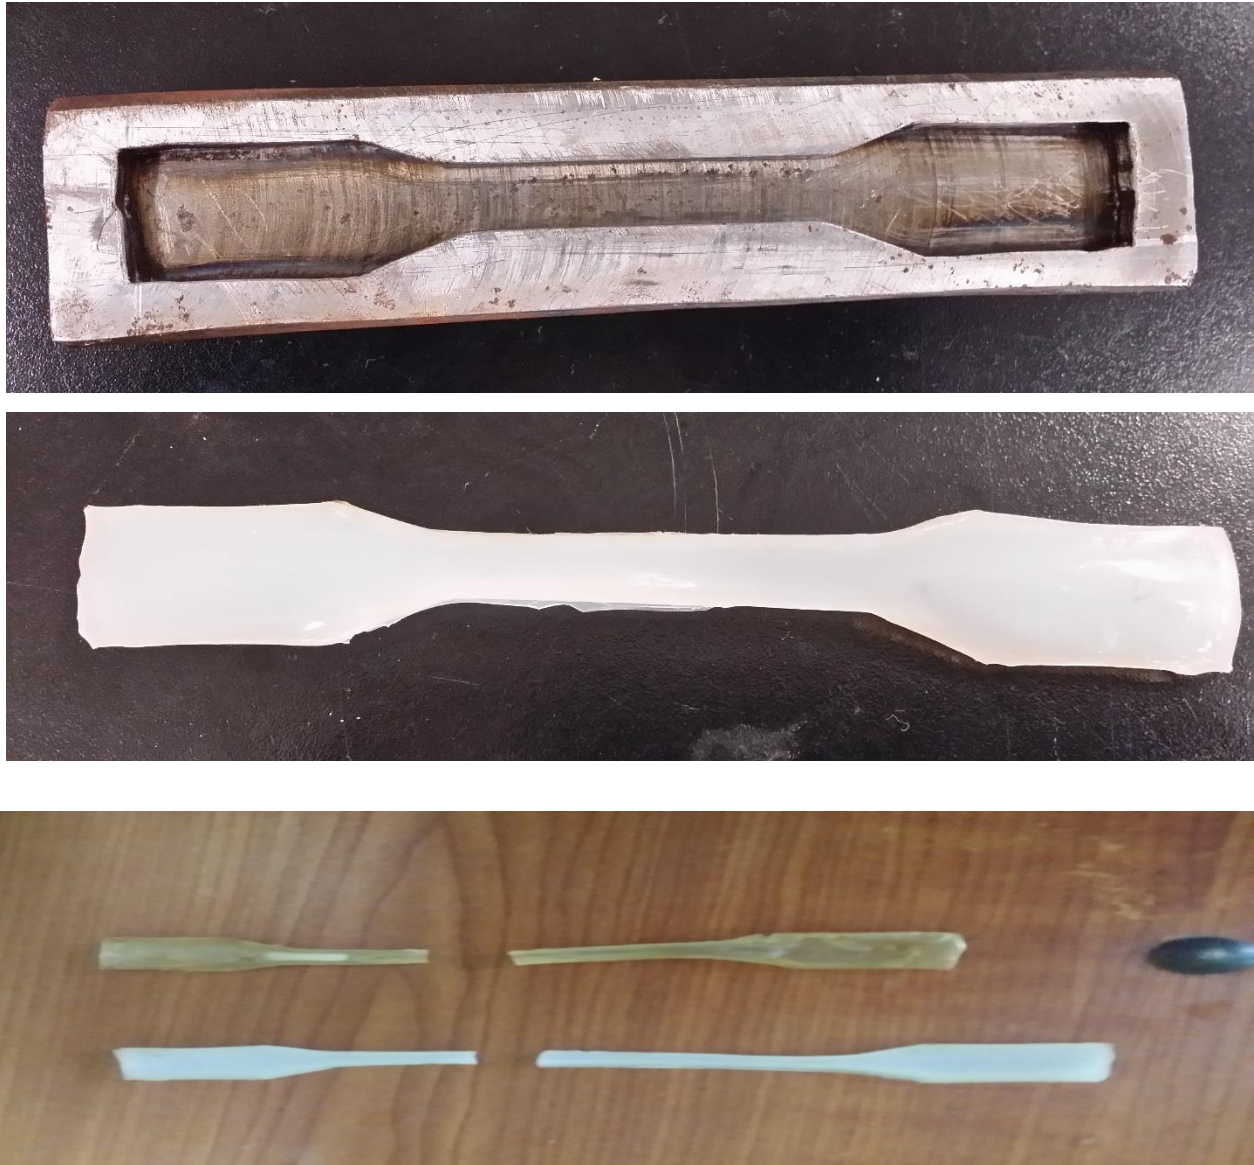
Mild steel mold prepared according to the dimensions specified in ISO 527 for making the specimen that undergo tensile test
